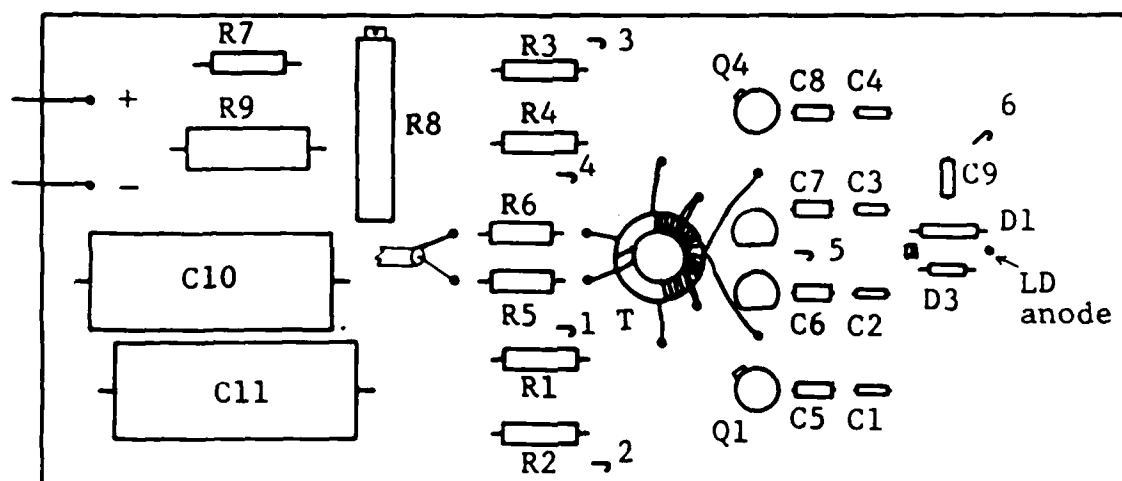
Component placement diagram of the pulsed laser diode driver board.
